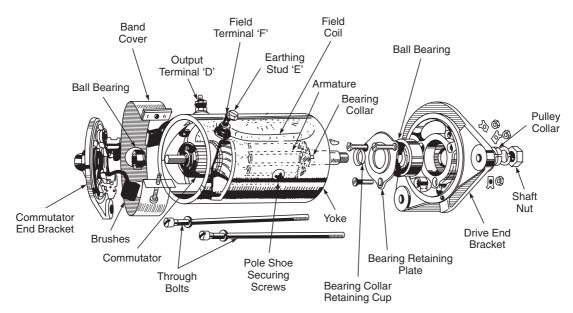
Exploded View of Generator Model C40 LQ (Courtesy: TVS)
